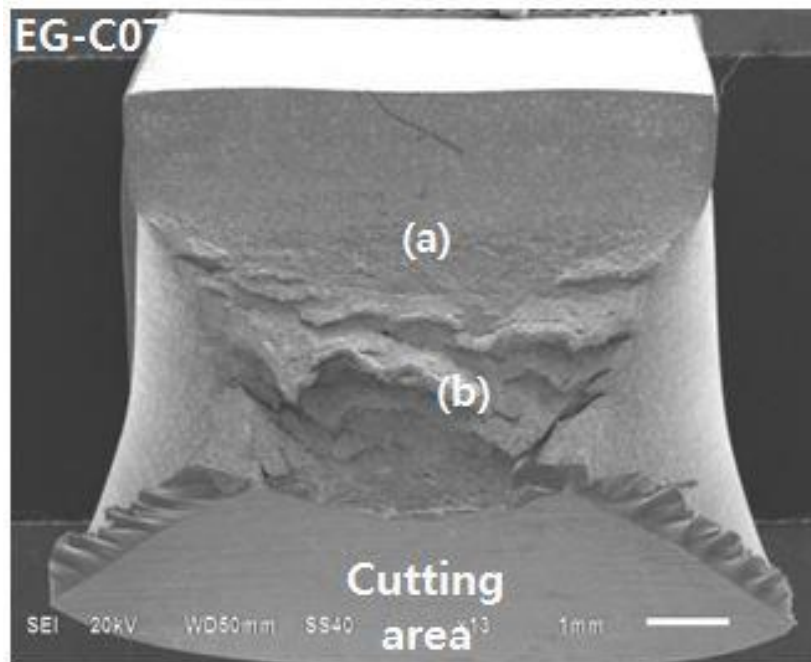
Fractographs of Charpy impact specimens fractured at 0°C for the EG-C07 fusion line +2mm specimen
